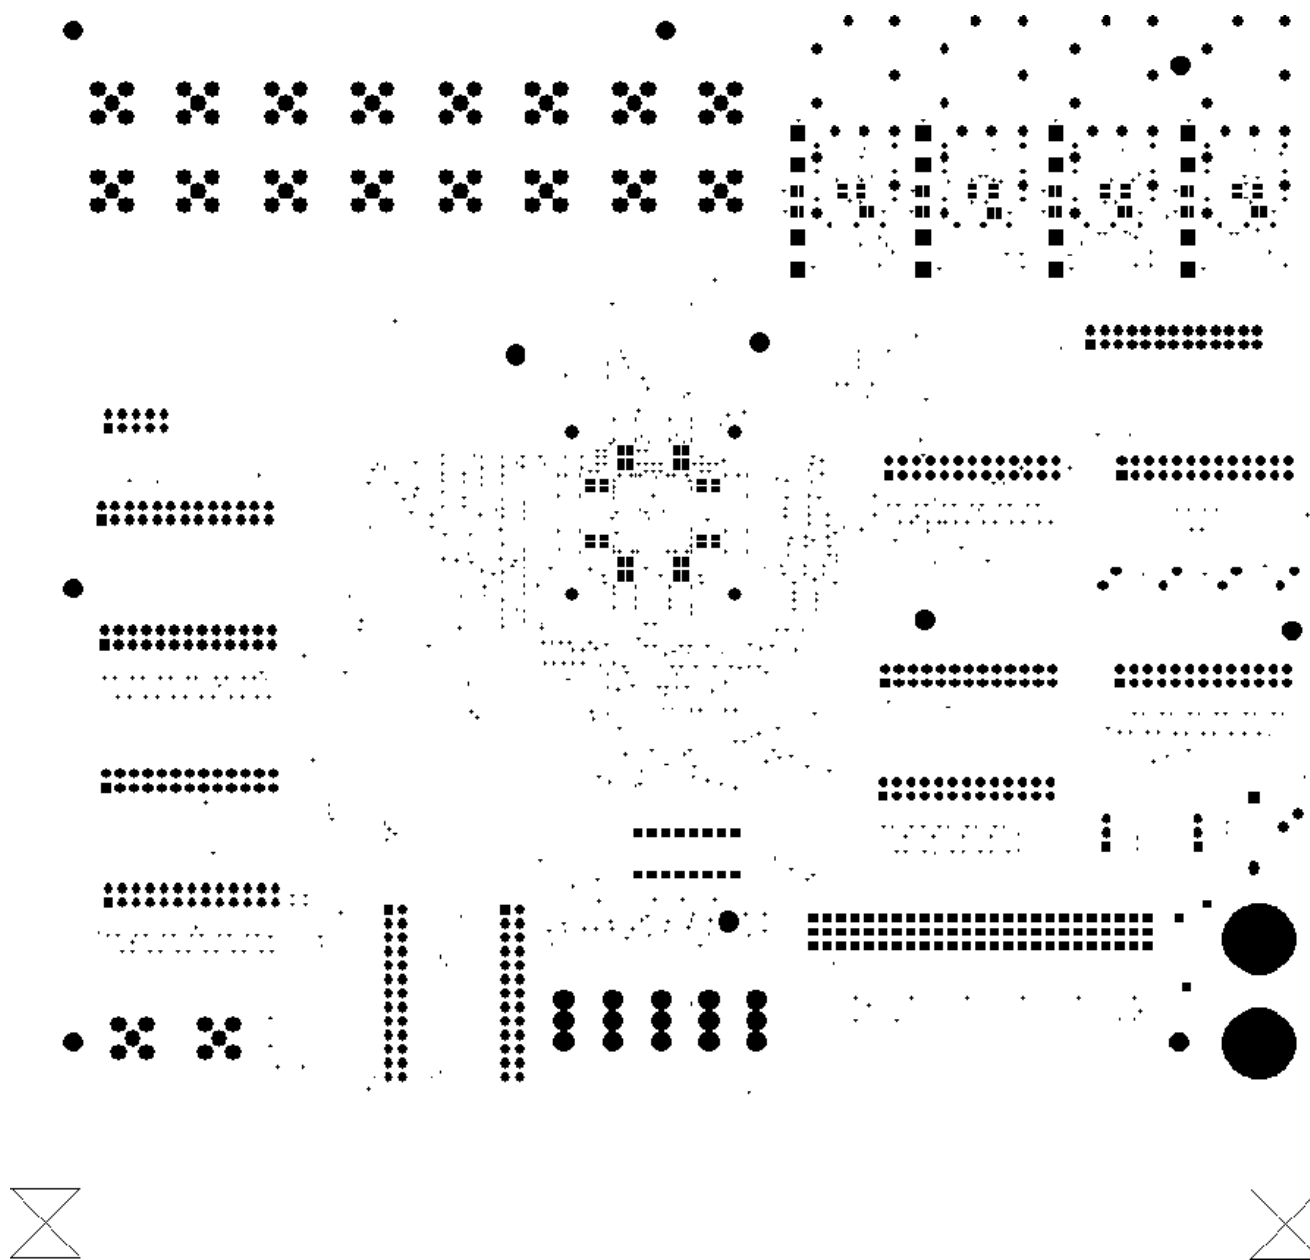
CYP15G0401DXB Eval Board Bottom Solder Mask Layout
